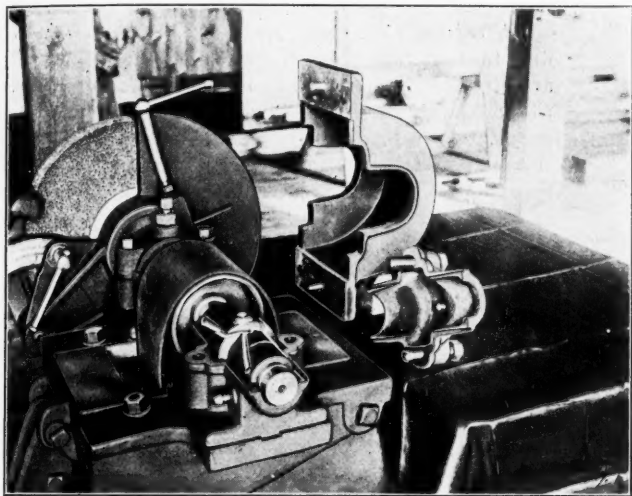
Belt-cover, Bearing Cap, and Upper Half of Box removed.
